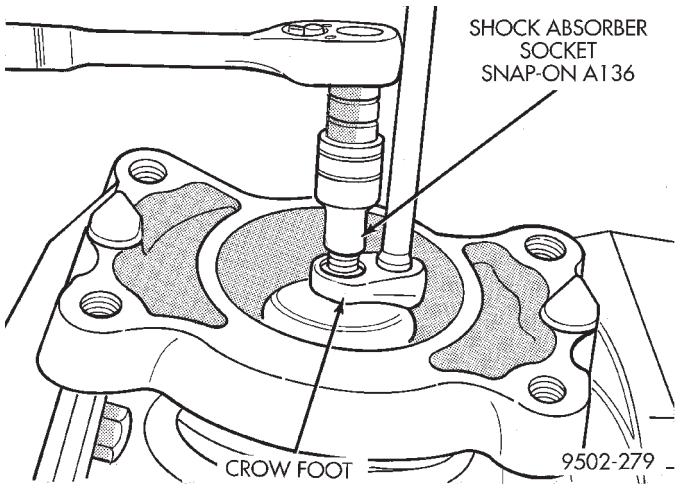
Shock Absorber Shaft Nut Removal/Installation
